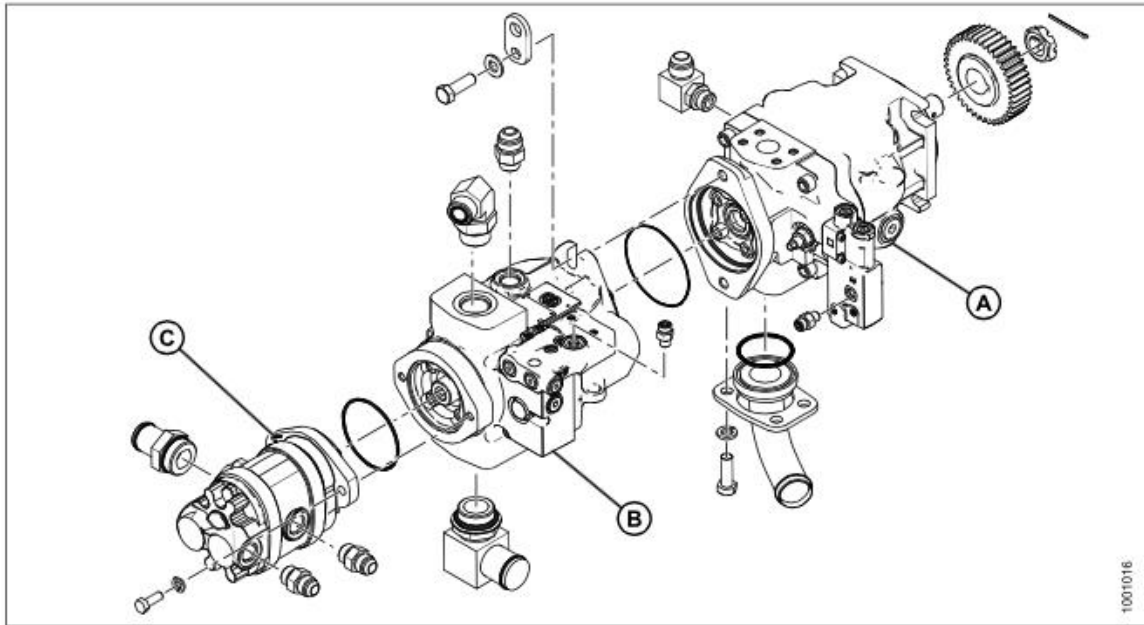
Header drive pumps including the (A) knife drive pump, (B) reel and draper pump, and (C) tandem gearlift pump [2].
